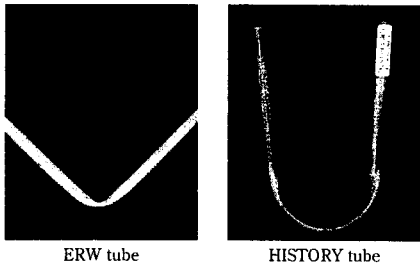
Appearance of bent tubes compared with HISTORY tube and ERW tube
